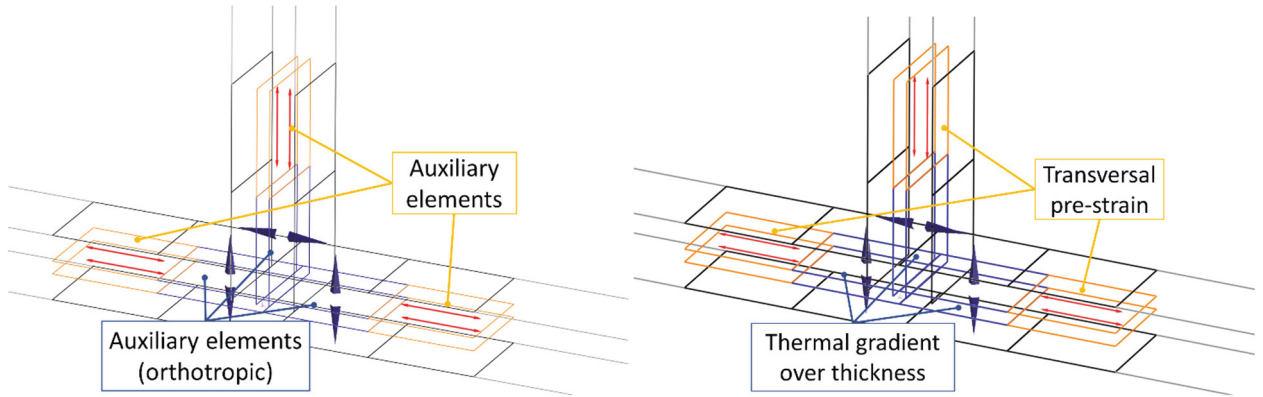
Auxiliary elements division and type of load applied. The auxiliary elements are superimposed to the virtual weld bead
